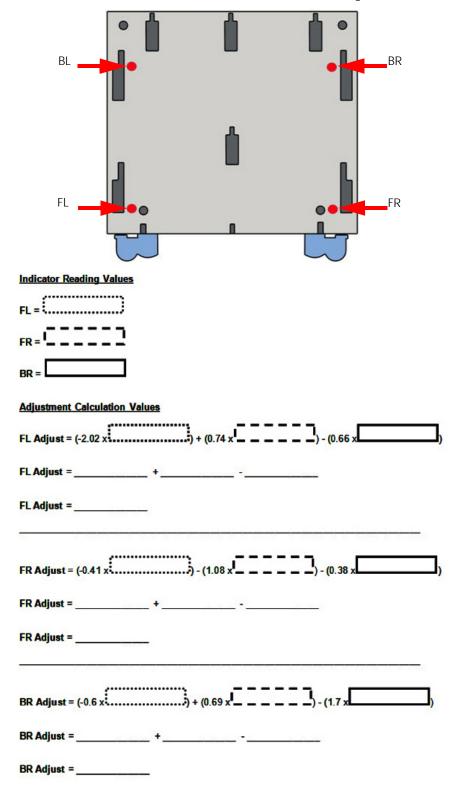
uPrint Plus and uPrint SE Plus measurement points and worksheet
